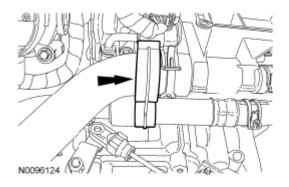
Identifying Coolant Hose Retainer Courtesy of FORD MOTOR CO.
